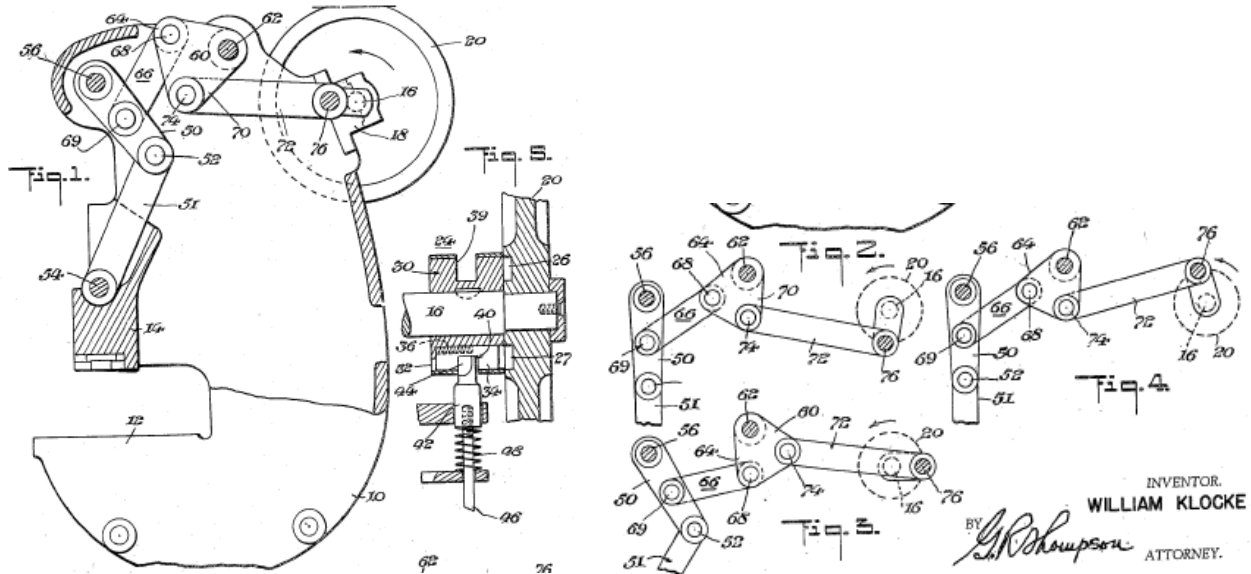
Mechanical crank press with a triple composed mechanism (two bar mechanisms and a crank mechanism) for modifying the law of motion of the slide, according by patent US 2562044 [16]
